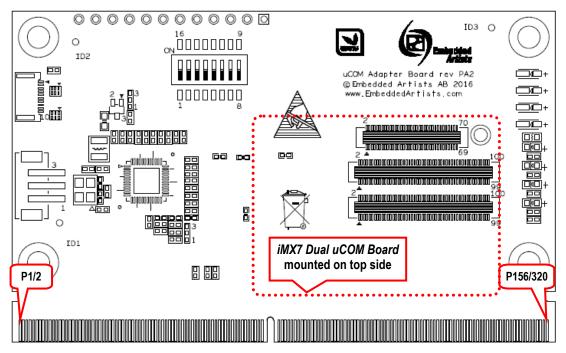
uCOM Adapter Board Pin Numbering, Top Side
